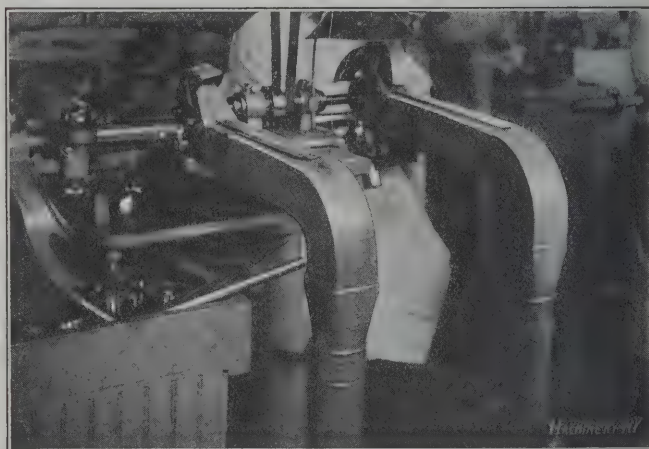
Dust Pipes and Wheel Guards on Universal Grinder
